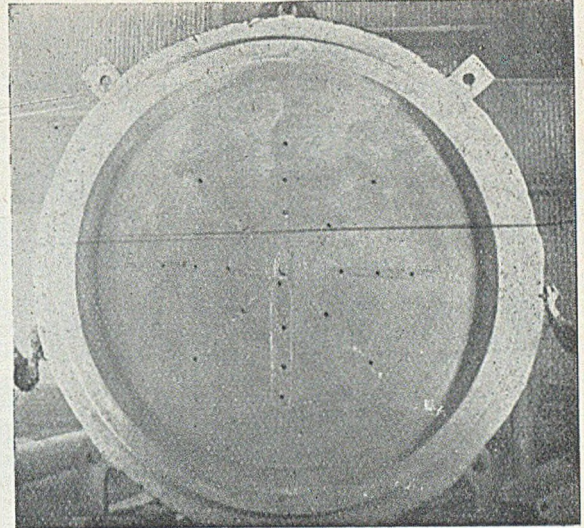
FINISHED TOP PART FOR THE DIE Mould.
